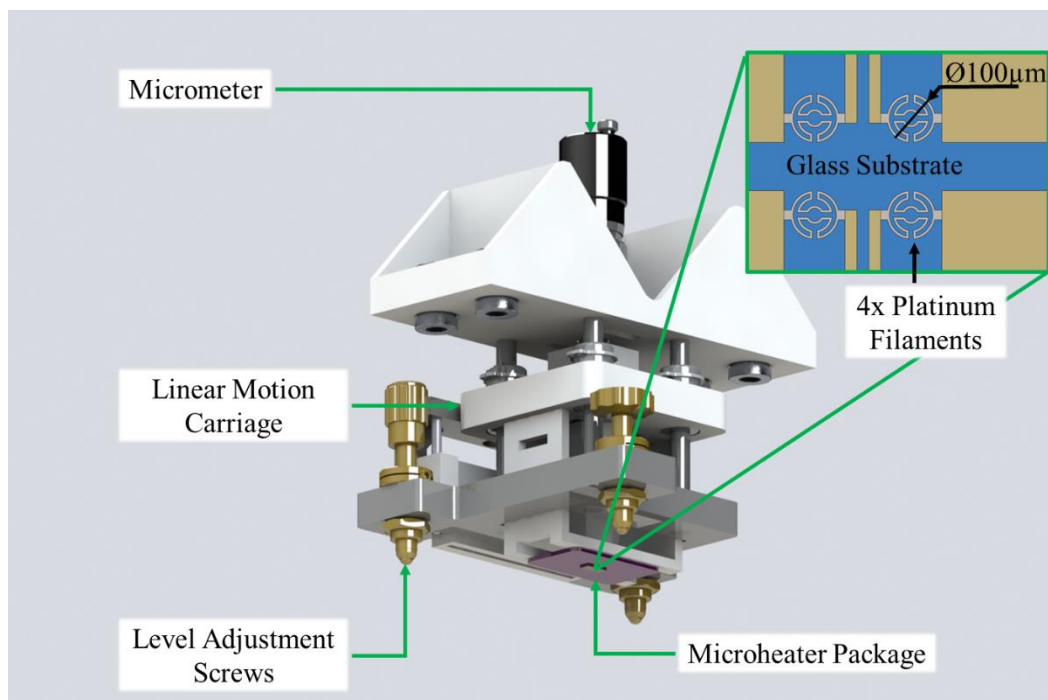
Model of the printhead assembly: precise positioning and leveling of the microheater, which is mounted to a linear motion carriage, is achieved with the micrometer and level adjustment screws [108].
